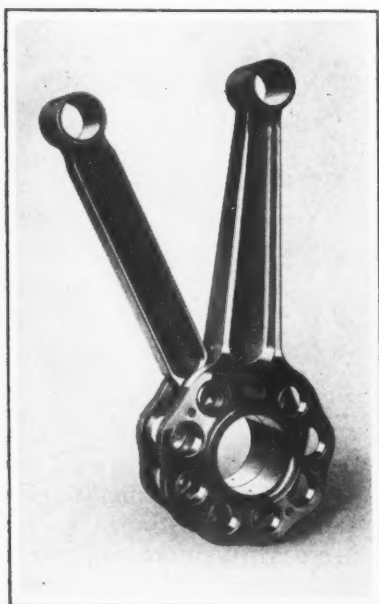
One-piece Master Rod with One of the Eight Link Rods Pinned to the Hub
